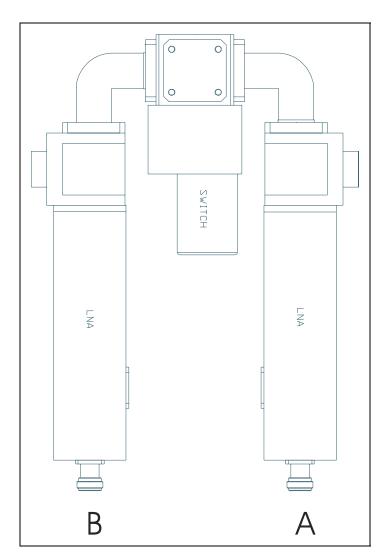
shows the position of the A side on the redundant LNA/B assembly.
